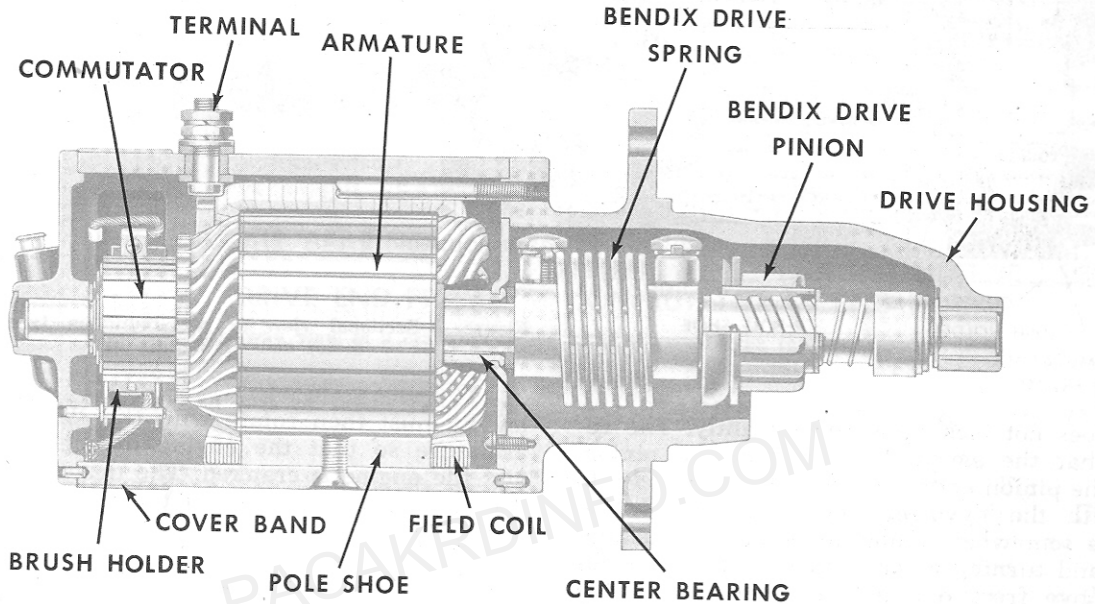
Sectional view of a standard Bendix drive type cranking motor.
